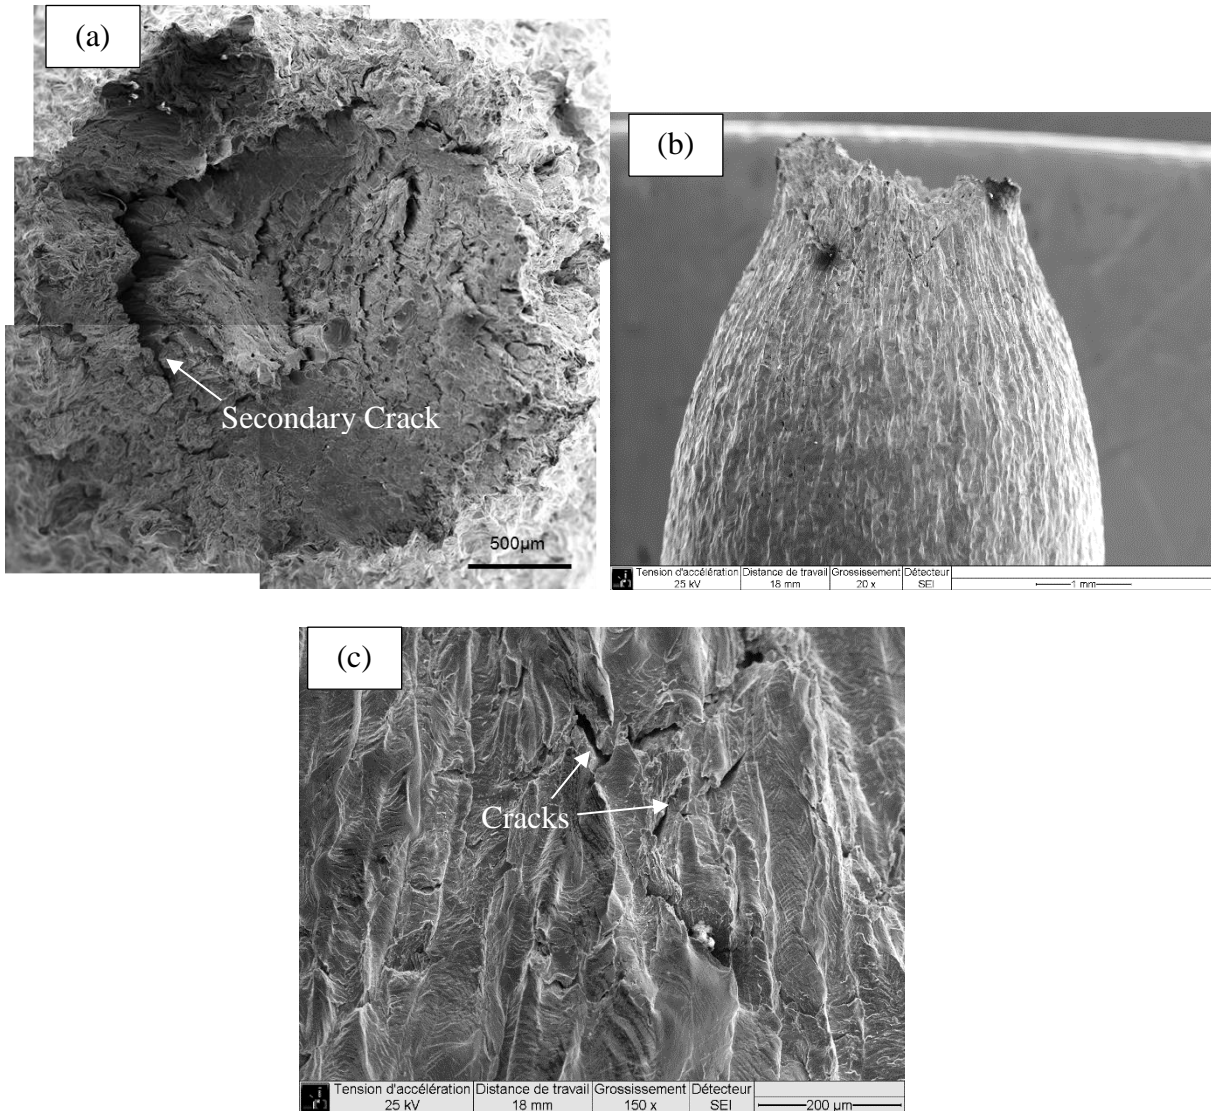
22 SEM images of the fracture surface (a) and the side view of the fracture part (b) of the specimen tested under hydrogen (FCS5).
